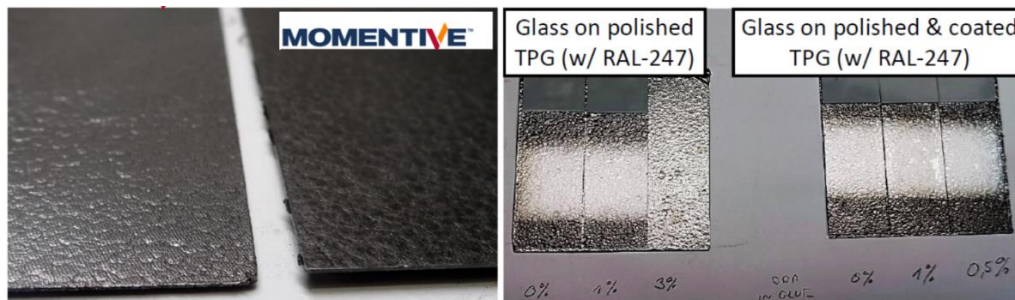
Left: Close ups of TPG sheets, delivered by MOMENTIVE. Right: Tests with surface treatment prior to glue dispensing, with glass sheets to allow for visual inspection and different amounts of wetting agent.
